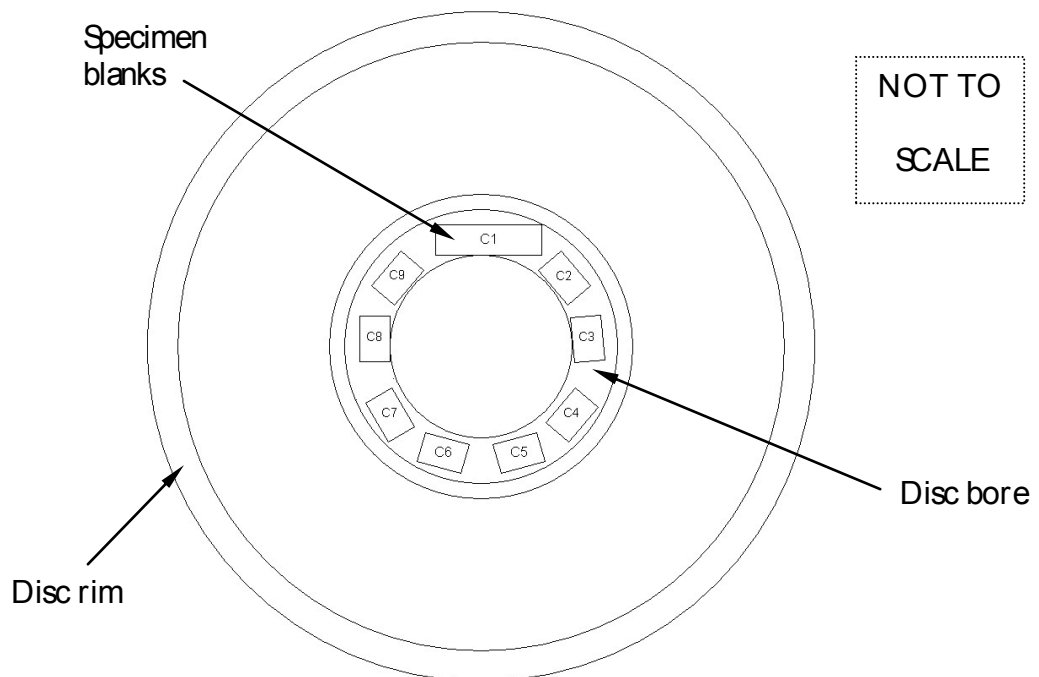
Sectioning of Ti6242 specimen blanks from compressor disc C bore (Plan view schematic of disc front face)
